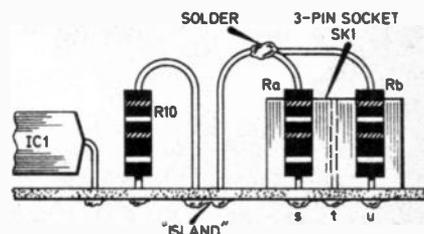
(b) Edge-on view of p.c.b. showing how the additional resistors are mounted in place of the 7-way socket block. (Individual 3-pin sockets are installed for each channel used).
